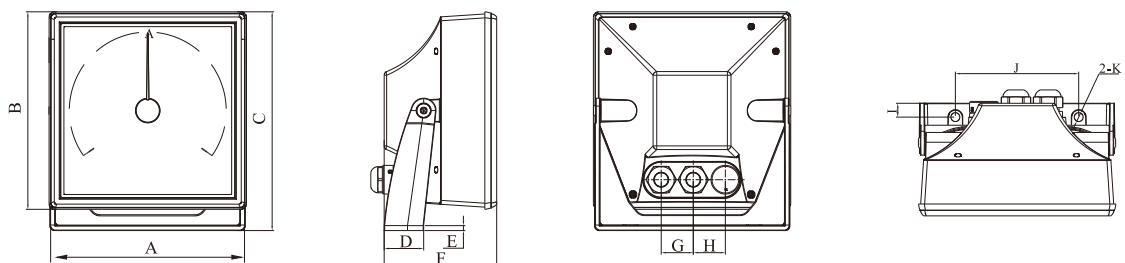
Dimension(Bridge Wing) 图2 壁挂式尺寸
